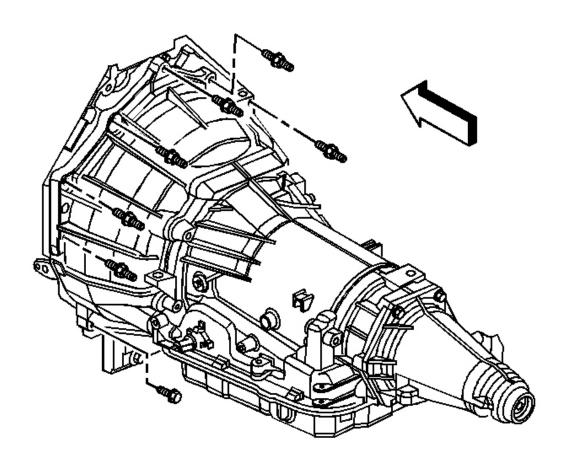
View Of Automatic Transmission Bolt/Studs (4.8L, 5.3L, and 6.0L Engines) Courtesy of GENERAL MOTORS CORP.
